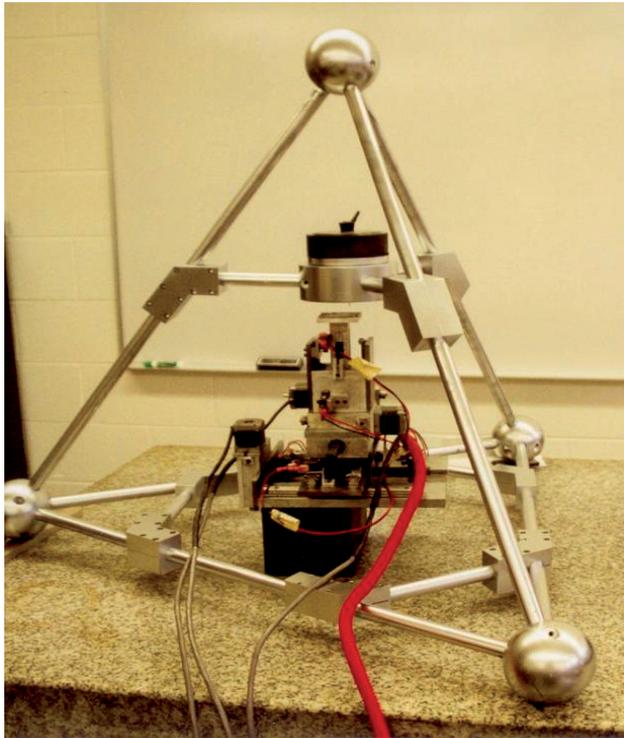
Micro machine tool showing tetrahedral spaceframe surrounding the precision x-y-z table and the extremely high-speed air turbine spindle
